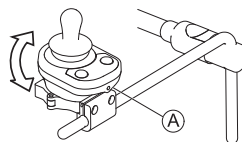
Example of DLX-REM400 adjustment. DLX-REM110, DLX-REM211 and DLX-REM216 are adjusted the same way.
